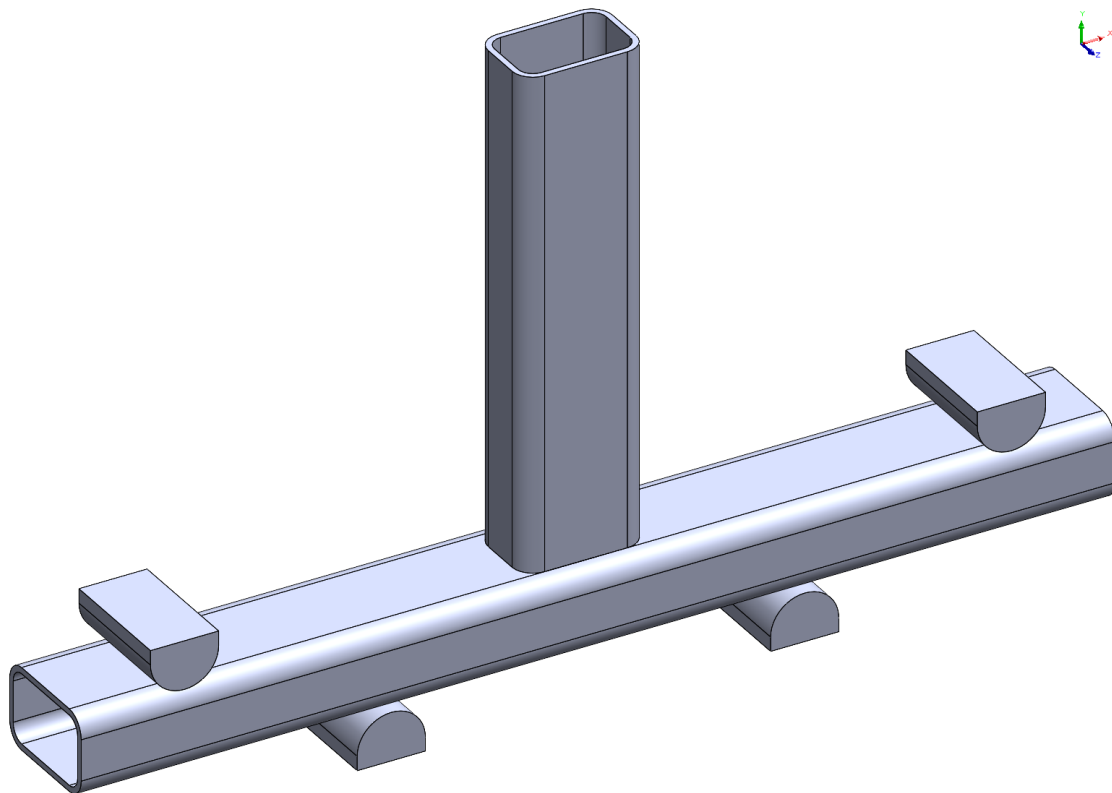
CAD model of the welded specimen for *FEMFAT Weld* validation
